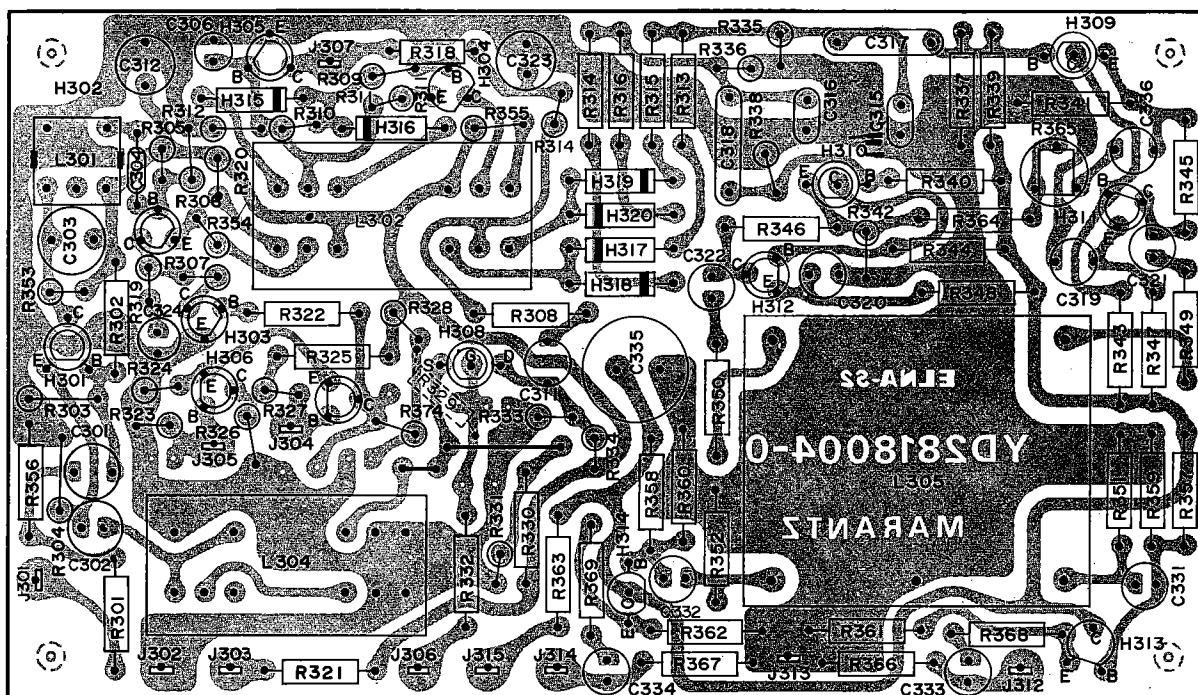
MPX Stereo Decoding Amplifier Assembly P300 Component Locations
